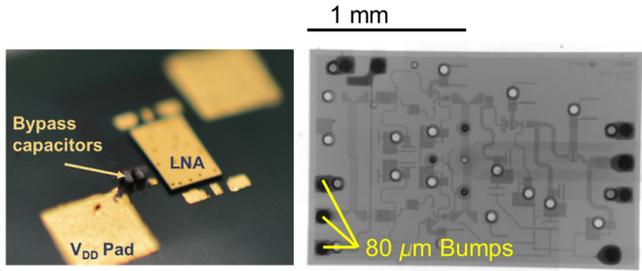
3-D view of the backside of the package (left) and X-ray inspection of solder balls mounted on SMD pads (right).
